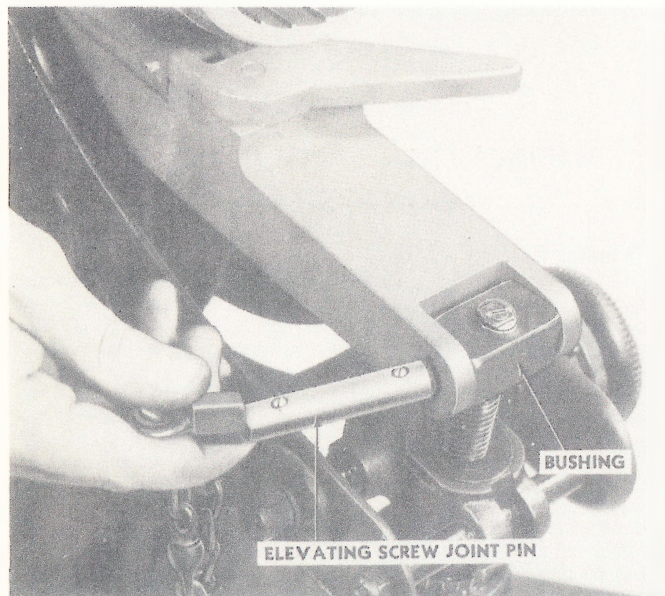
Securing rear of mounting bracket to elevating and traversing mechanism.
